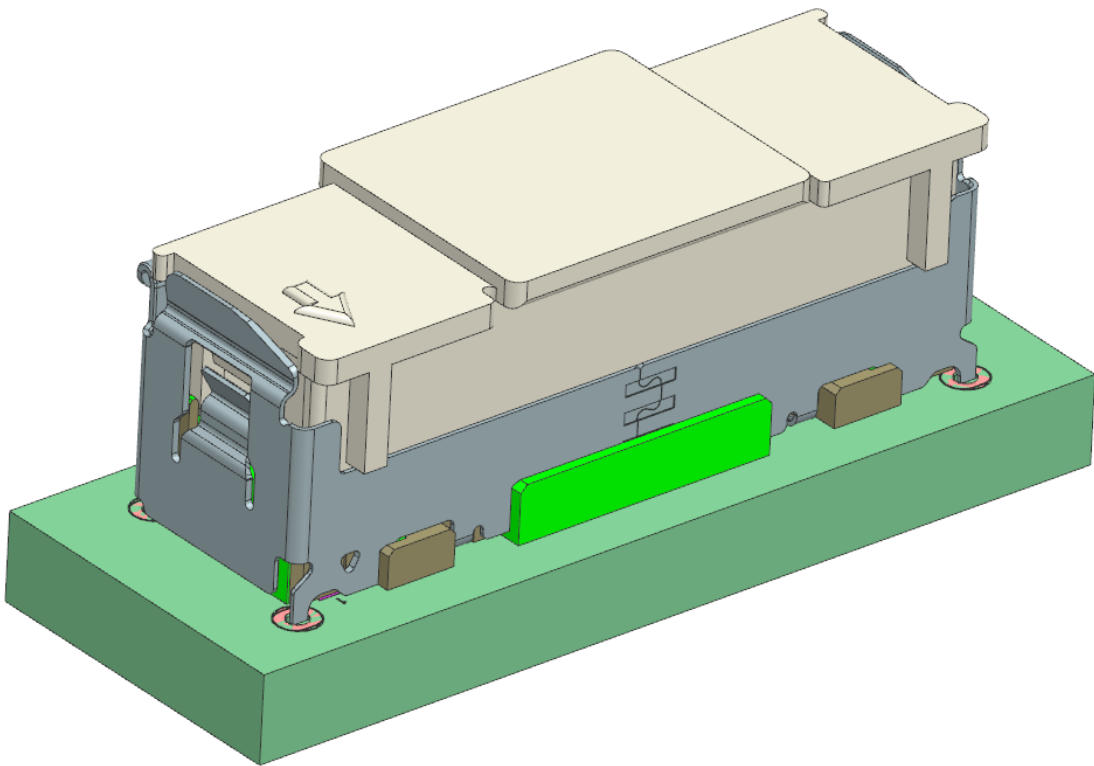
Fixed-Side Connector with Vacuum Cap
